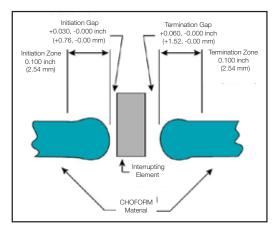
Top View Location tolerances for bead initiation & termination zones (cross-sectional view)
